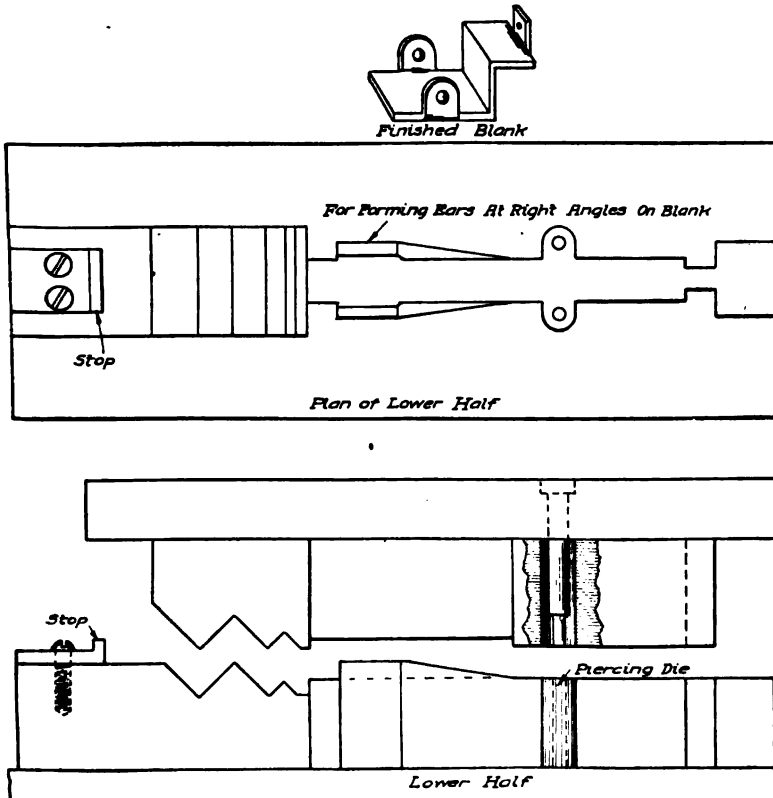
Two-Punch Die with Formed Ears on Finished Blank
